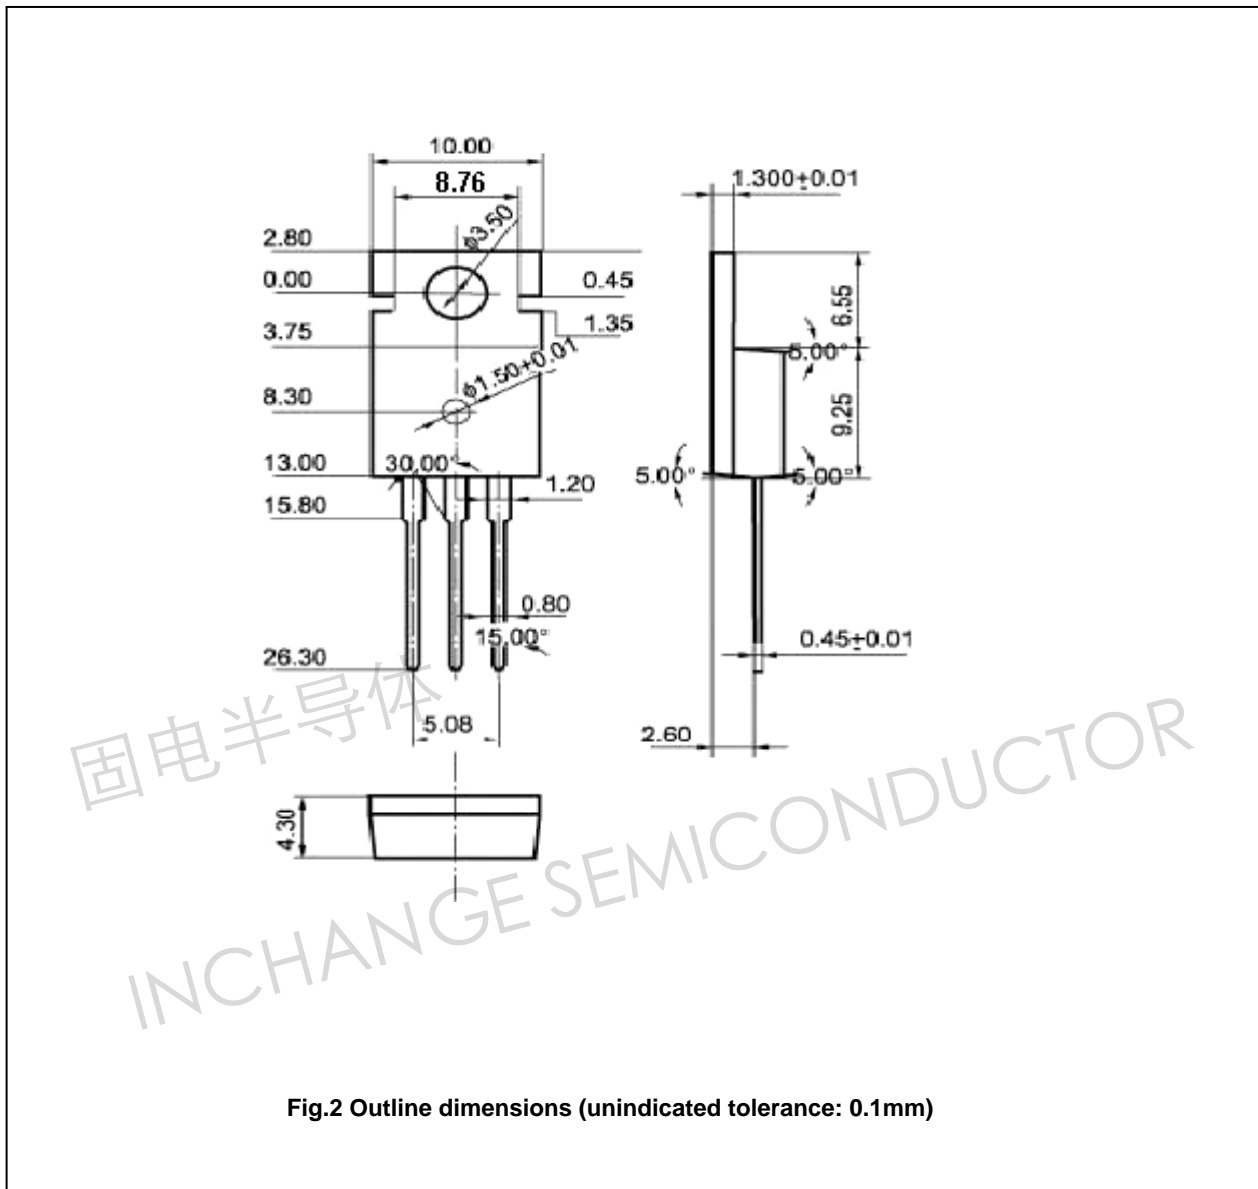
Outline dimensions (unindicated tolerance: 0.1mm)
